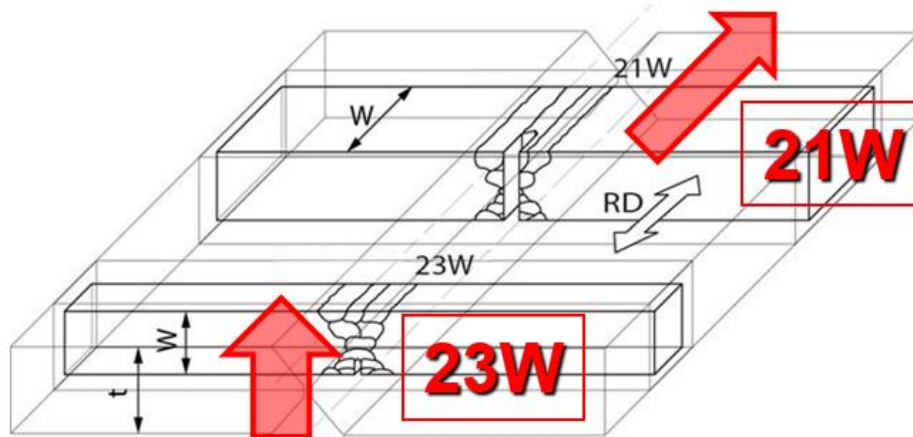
TPB specimen locations in welded joint with notch directions ($RD =$ rolling direction).
